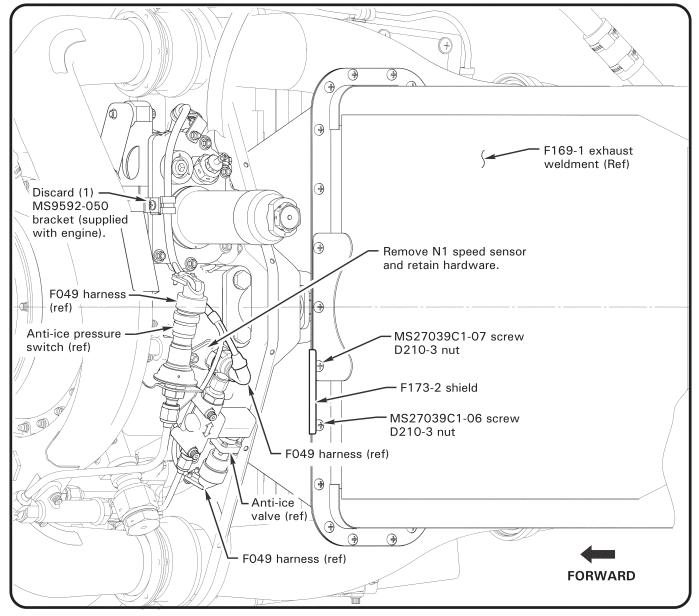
F049 engine electrical harness assembly (Remove existing harness & bracket from engine)
